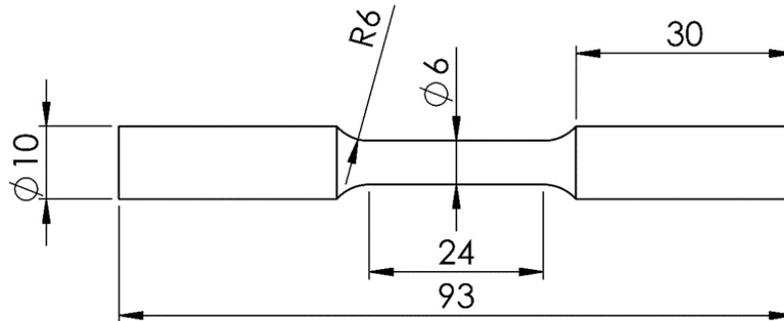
The geometry of net-shaped tension test specimens according to ASTM E8. All dimensions are in mm.
